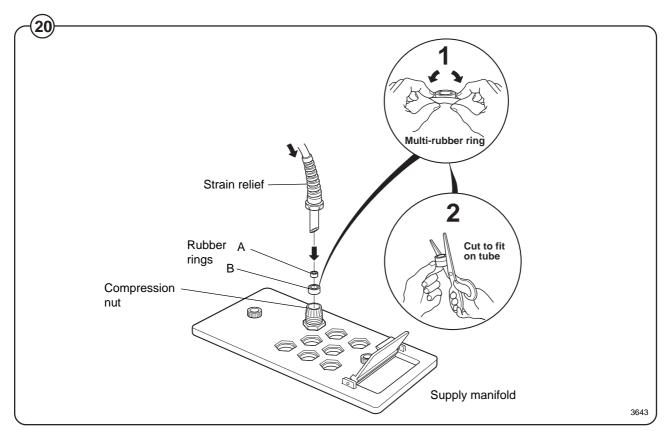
Select the correct size rubber ring which will fit snugly on the chemical tube you are using. Ring A is used for tubes with Ø5/16".
